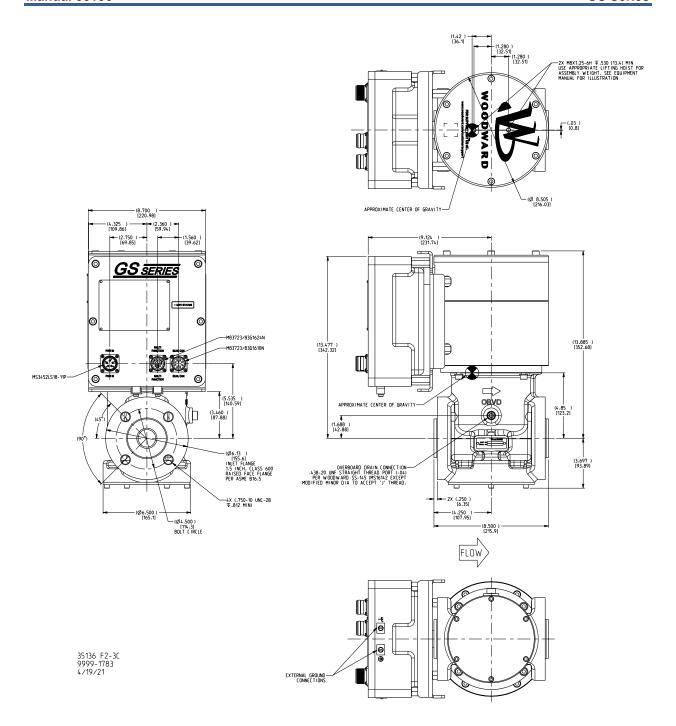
Outline Drawing Stainless Steel GS40 with Connectors
